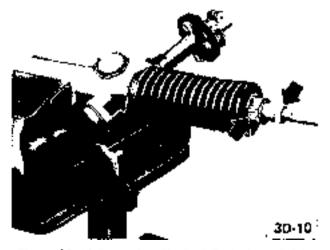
D-10 Removing Tie Rod Ends from Axial Joint
